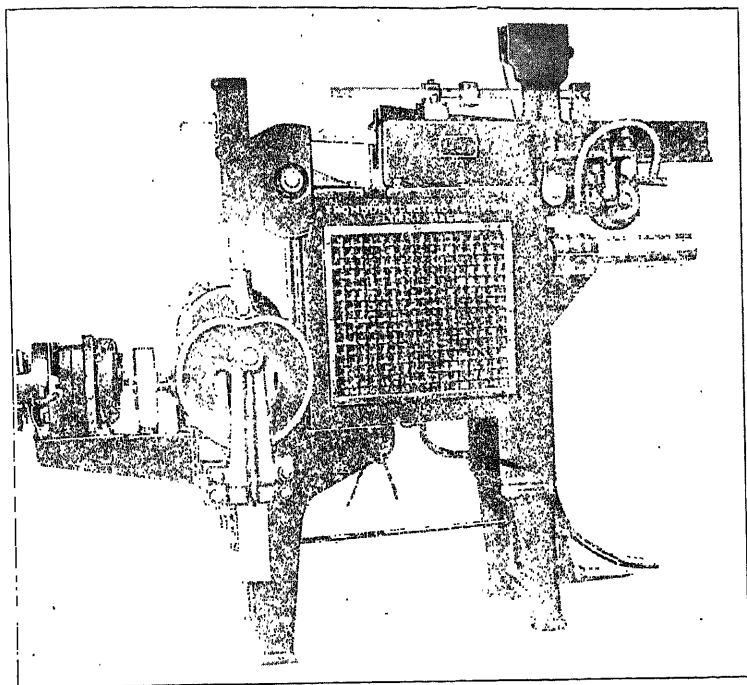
Model 306 Lap Seam Welding Machine.
